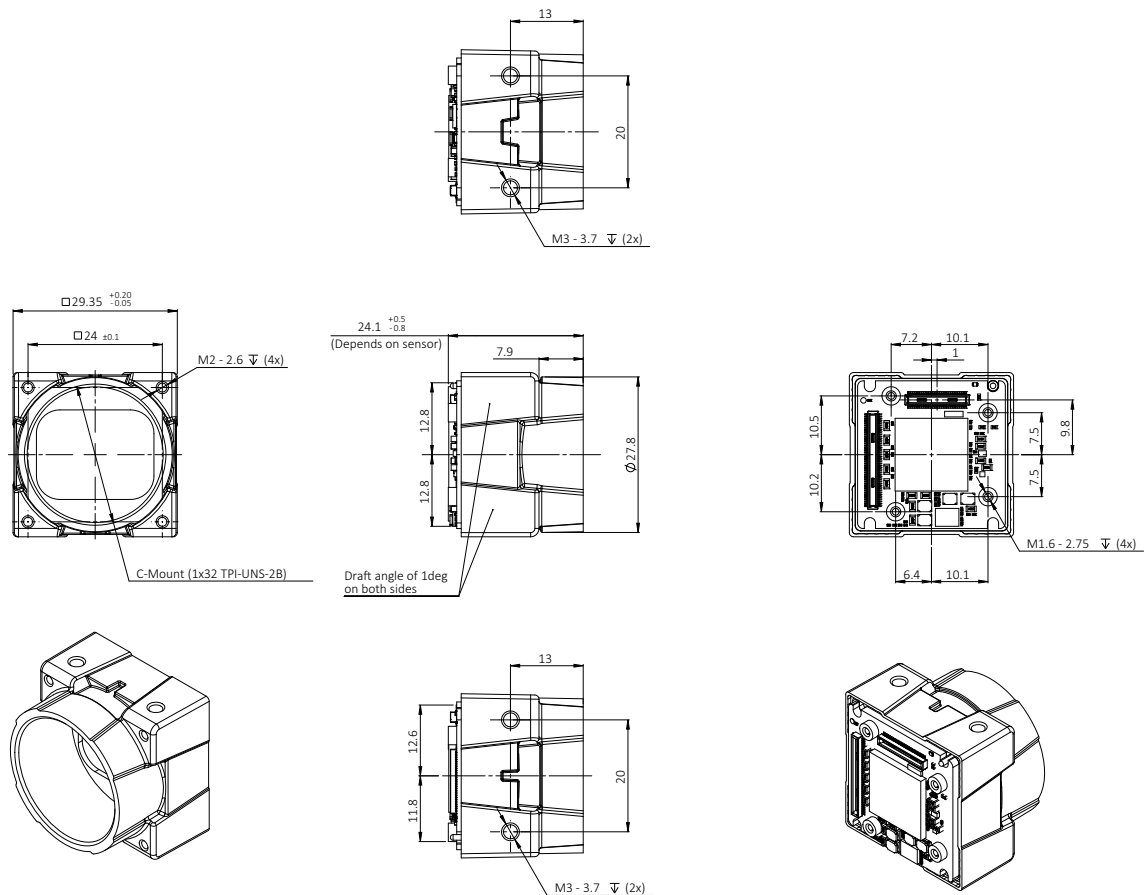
Open Housing C-Mount (Alvium Flex) dimensions
